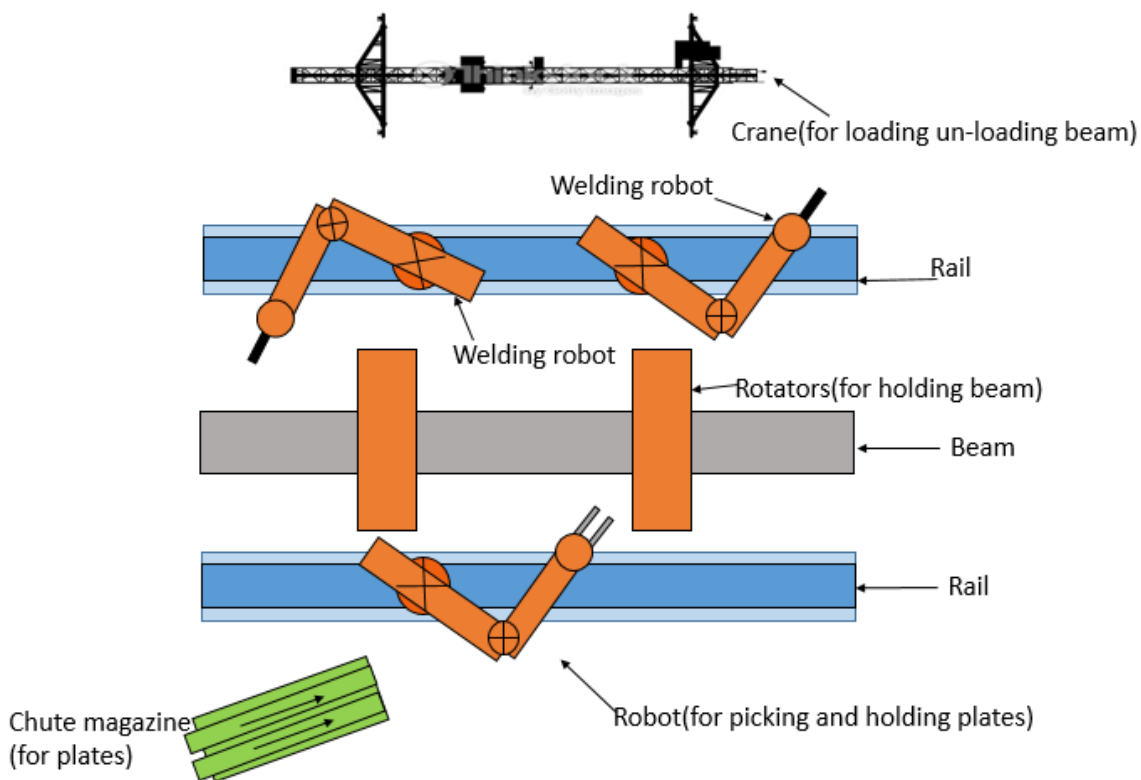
Beam and plate welding assembly plant (Idea adopted from Voortman automatic welding assembly plant)
